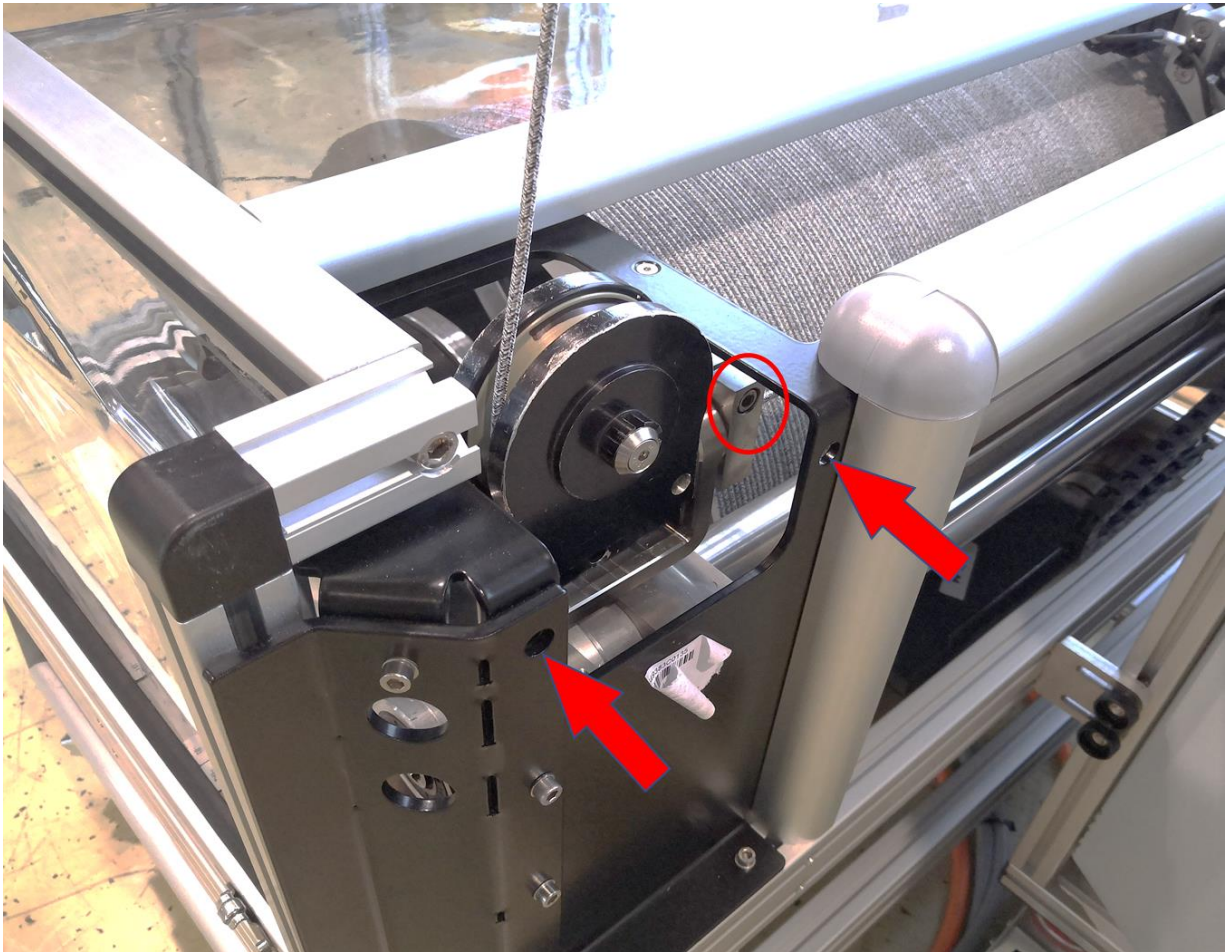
MK3 CABLE OUTLET PULLEY SCREWS
